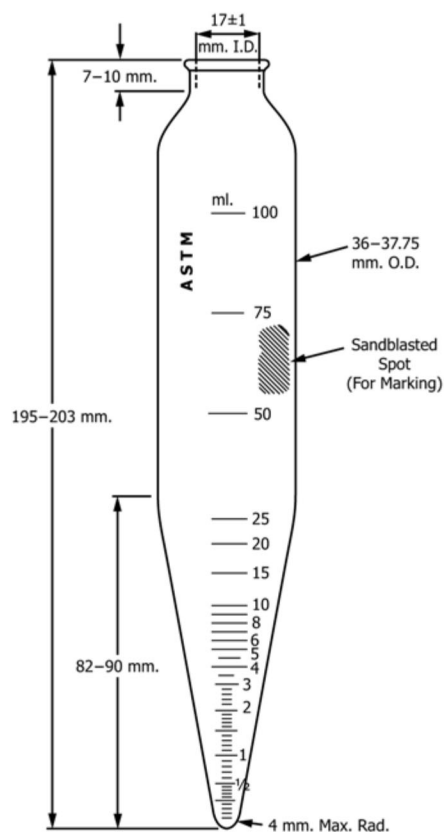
ASTM Cone-Shaped Centrifuge Tube
